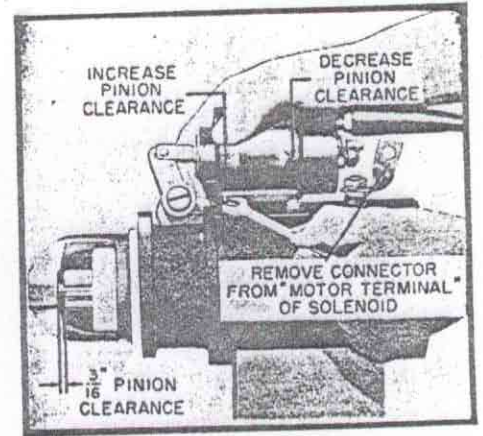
Adjusting pinion clearance on over-running clutch motor equipped with solenoid having a non-adjustable plunger stud
